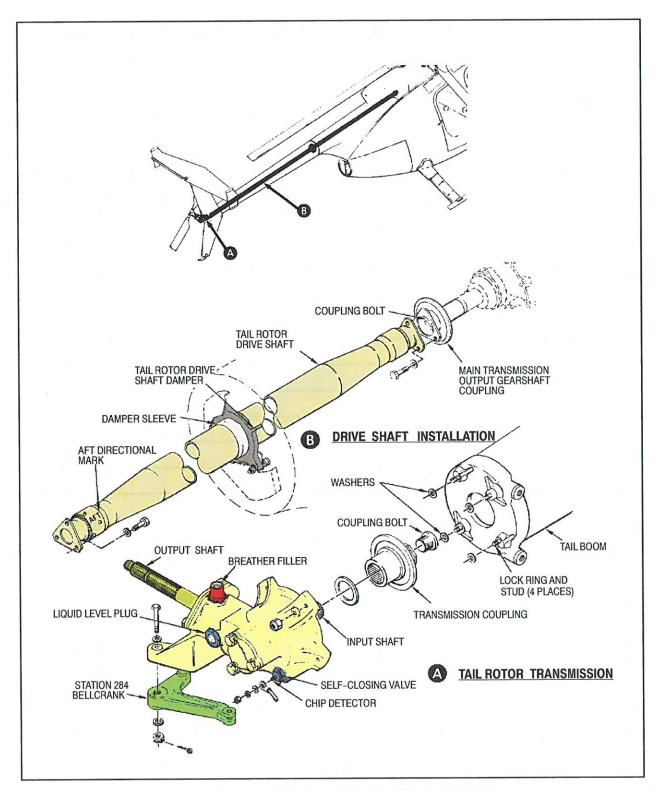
Tail Rotor Drive Shaft 500D/E
